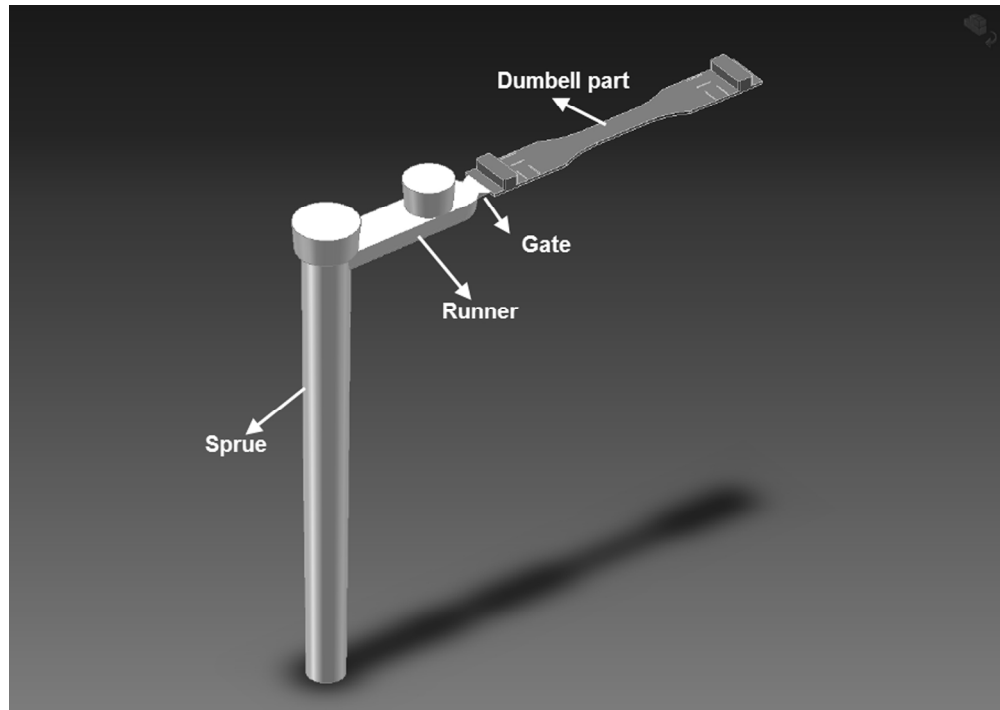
Mold and part: (b) geometrical model of dumbbell specimen with larger sprue, runner and gate
